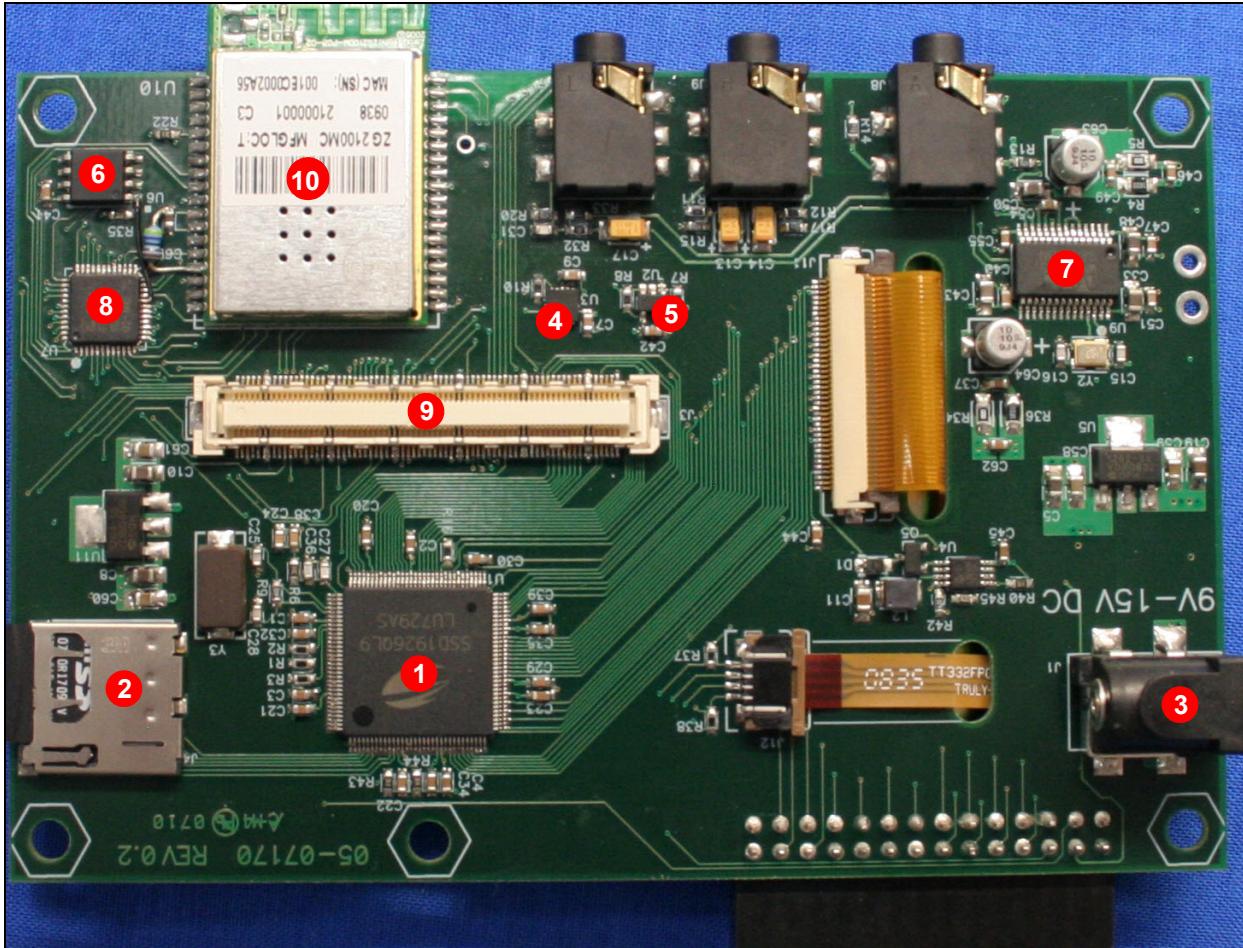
MULTIMEDIA EXPANSION BOARD COMPONENT LAYOUT (FRONT SIDE)
